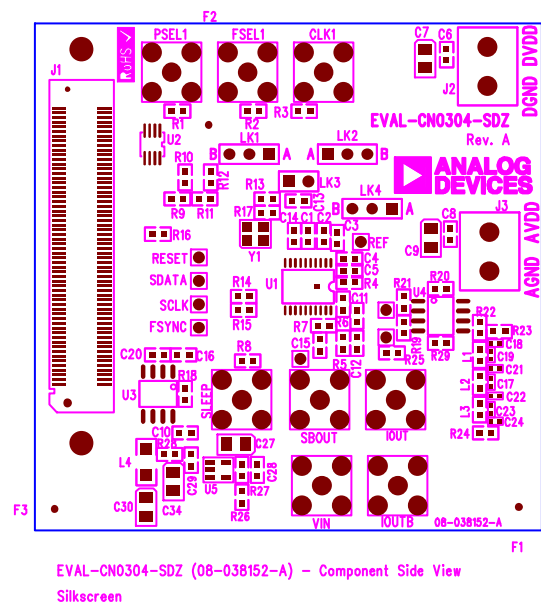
EVAL-CN0304-SDZ Component Side View Silkscreen
